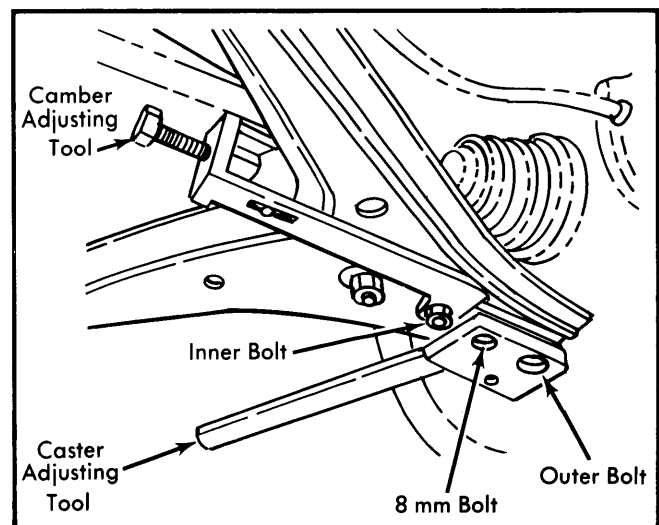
Adjusting Caster and Camber on Audi 100LS with Special Tool. Fox Camber Adjusting Tool is Similar
